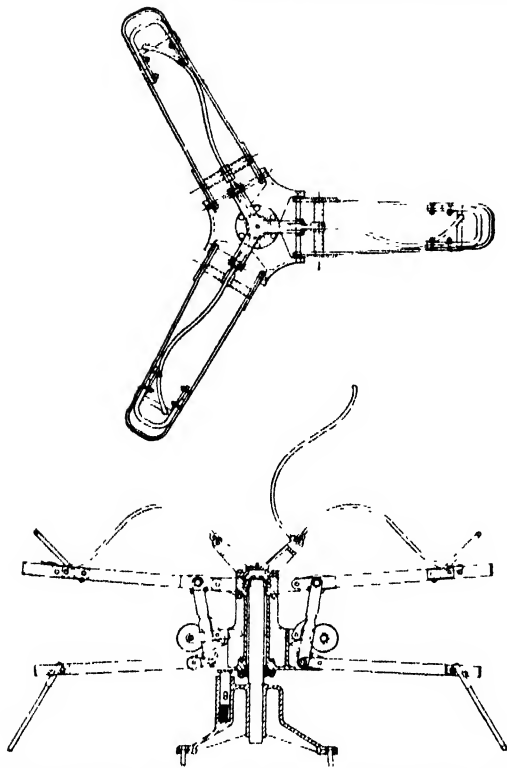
Plan and elevation sketch of a three-arm pay-off reel. (Courtesy of Morgan Construction Co.)
